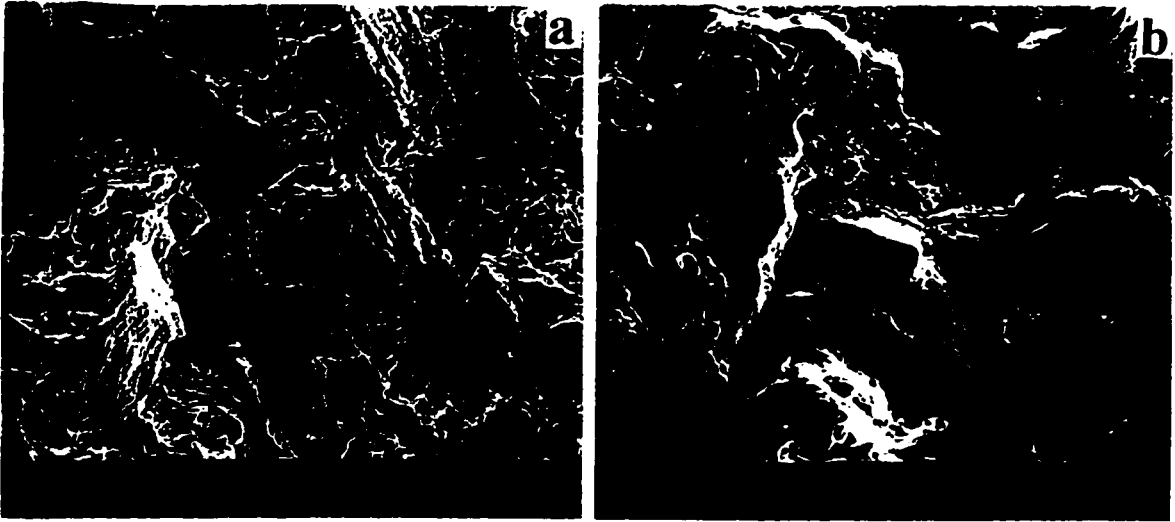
Fractographs showing the intergranular fracture with the microstructure
